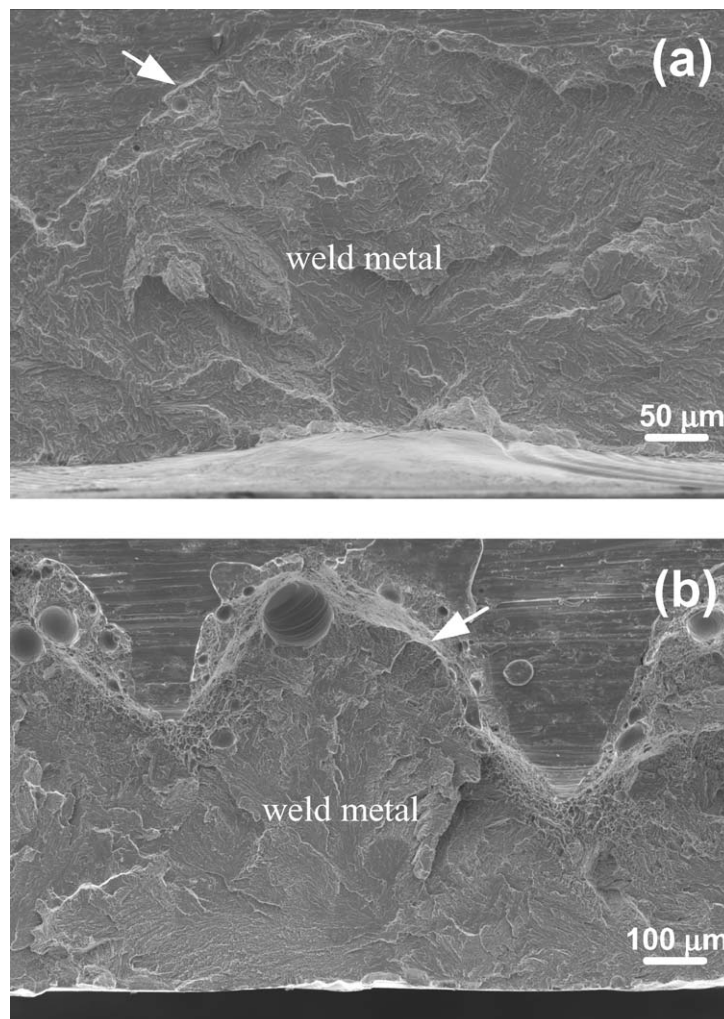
SEM observations of the breaking surface of the laser-welded cast Ti joint with a welding voltage of (a) 300 V and (b) 340 V after four-point bend testing (arrow indicated the fusion line of the weld metal).
